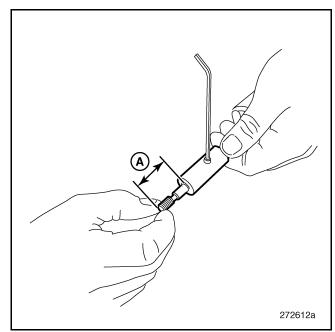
Adjusting Copper Sleeve Extractor Bolt
